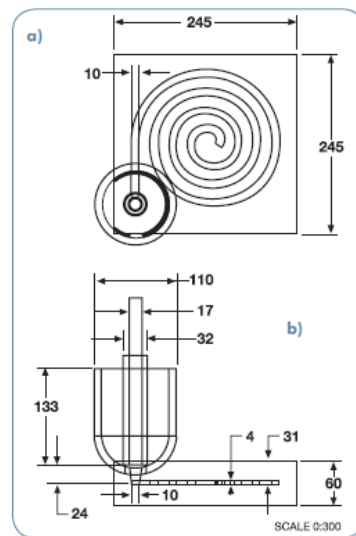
a) Top and b) side views of the spiral-shaped fluidity test [7].
